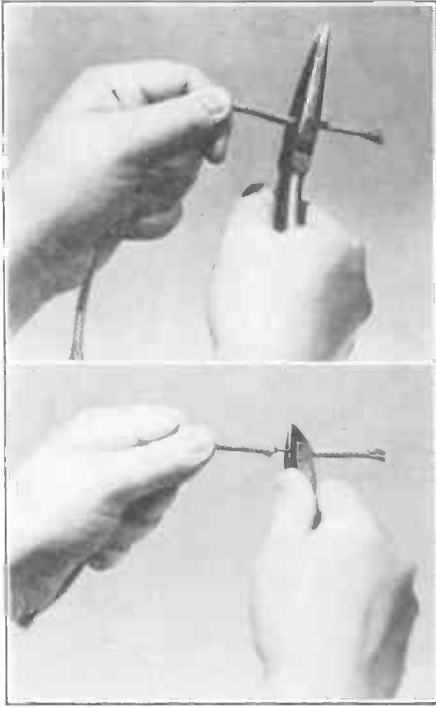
This shows how to use a pair of long-nose pliers to squeeze the insulation on a piece of ordinary insulated wire so it can be removed more easily. If your pliers have wire-cutting jaws near the pivot, you will have to place the wire closer to the end of the pliers. Sometimes it is convenient to use a pair of sidecutters to remove insulation. This is done by carefully cutting only the insulation, and then pulling the insulation free by moving the sidecutters toward the end of the wire.
